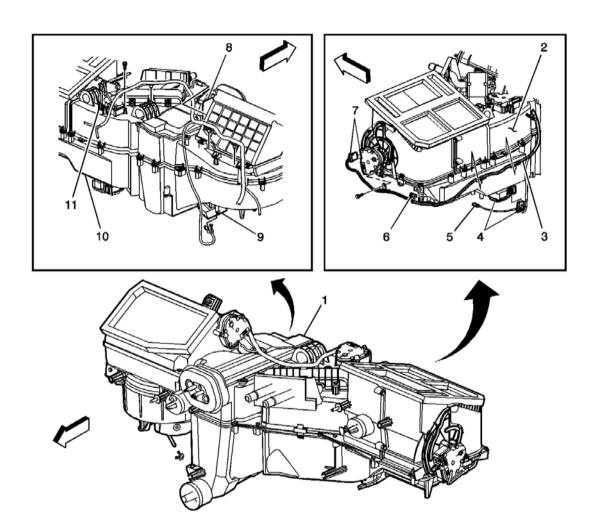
HVAC Subsystem Component Views (2 of 2) Courtesy of GENERAL MOTORS CORP.
